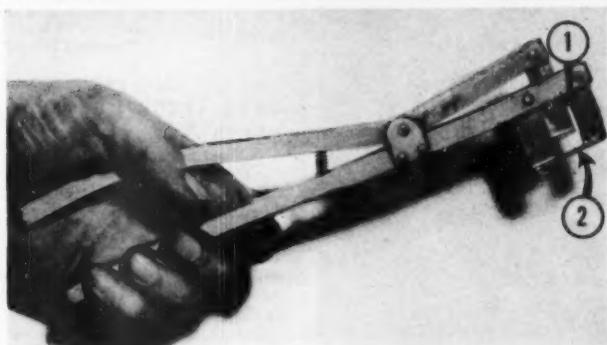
Slot plier has movable hinged jaw (1) which rises against slot flange; and stationary tamping jaw (2) which presses against coils when handles are pressed together.
